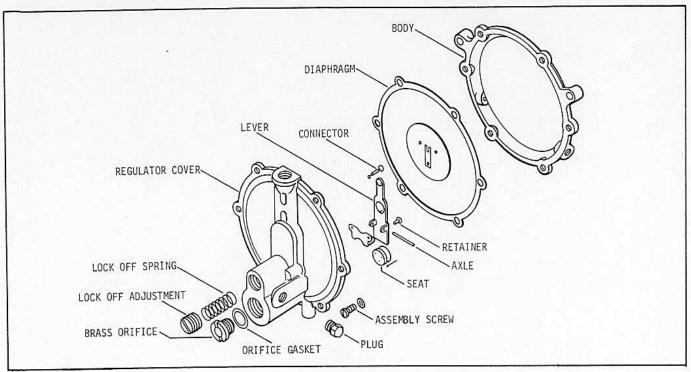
DISASSEMBLY MODEL KN REGULATOR
